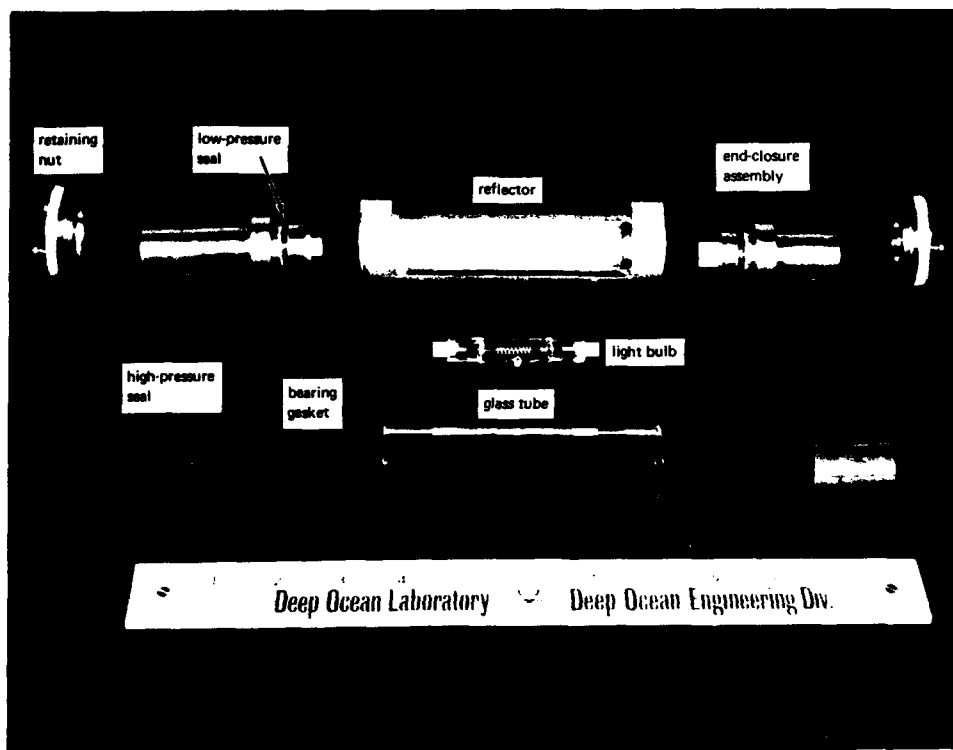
Mk IX deep-submergence light assembly utilizing a tubular glass housing, disassembled.
